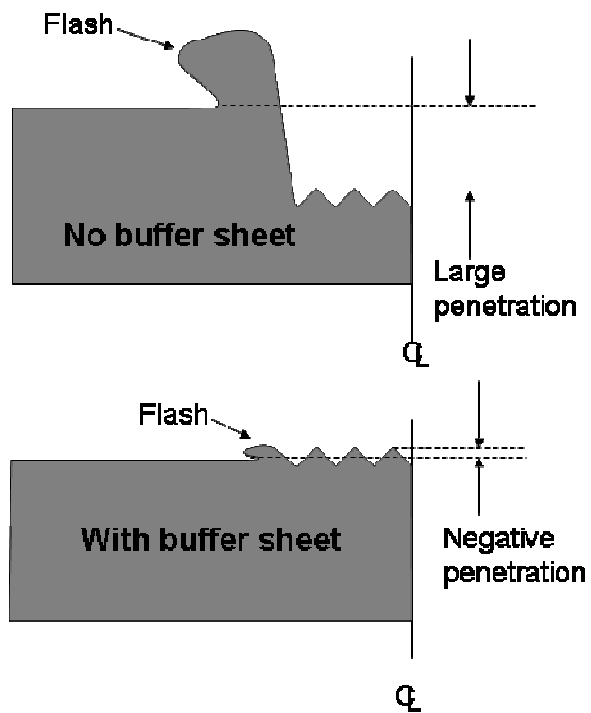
Cartoon detailing penetration measurements at the weld centerline (CL)
